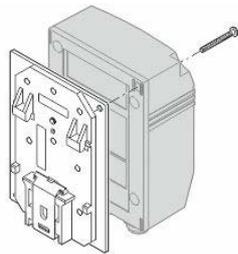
Fixing the EPA to the mounting kit for the DIN rail
